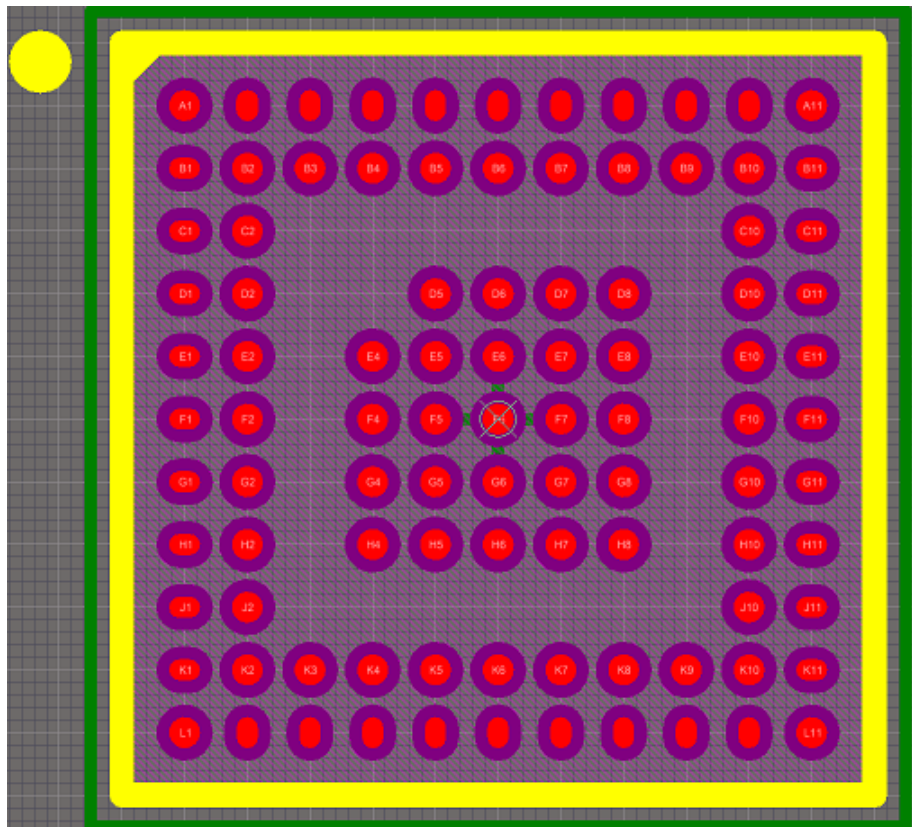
Top View Alternate TPS65983B Footprint (Oval Pads)
